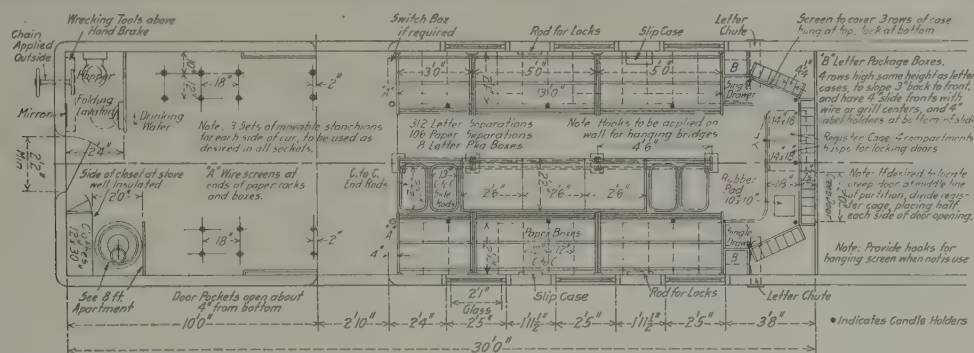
Floor Plan Showing U. S. Government Requirements for 30-ft. Mail Apartment.
